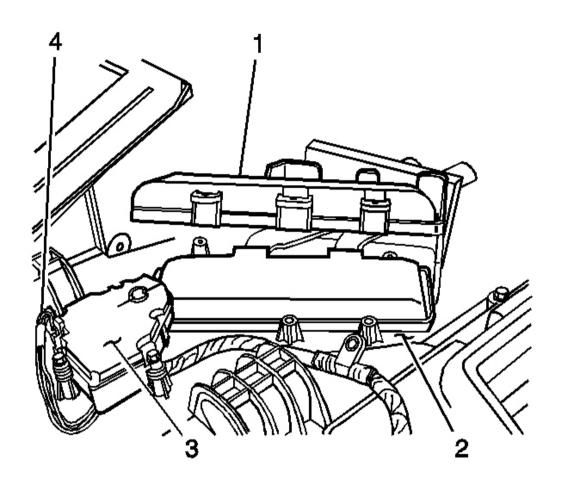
Heater Core Cover And HVAC Module Assembly Courtesy of GENERAL MOTORS CORP.
